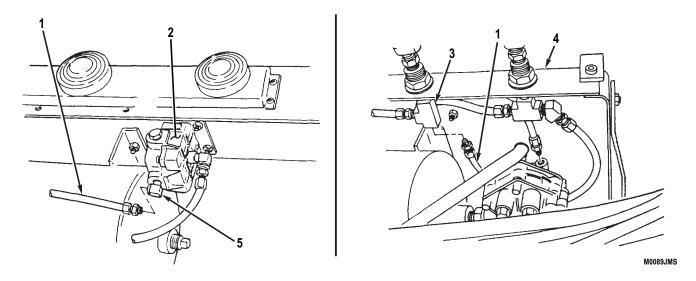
Relay Valve-to-Tee Tube Assembly Replacement.
